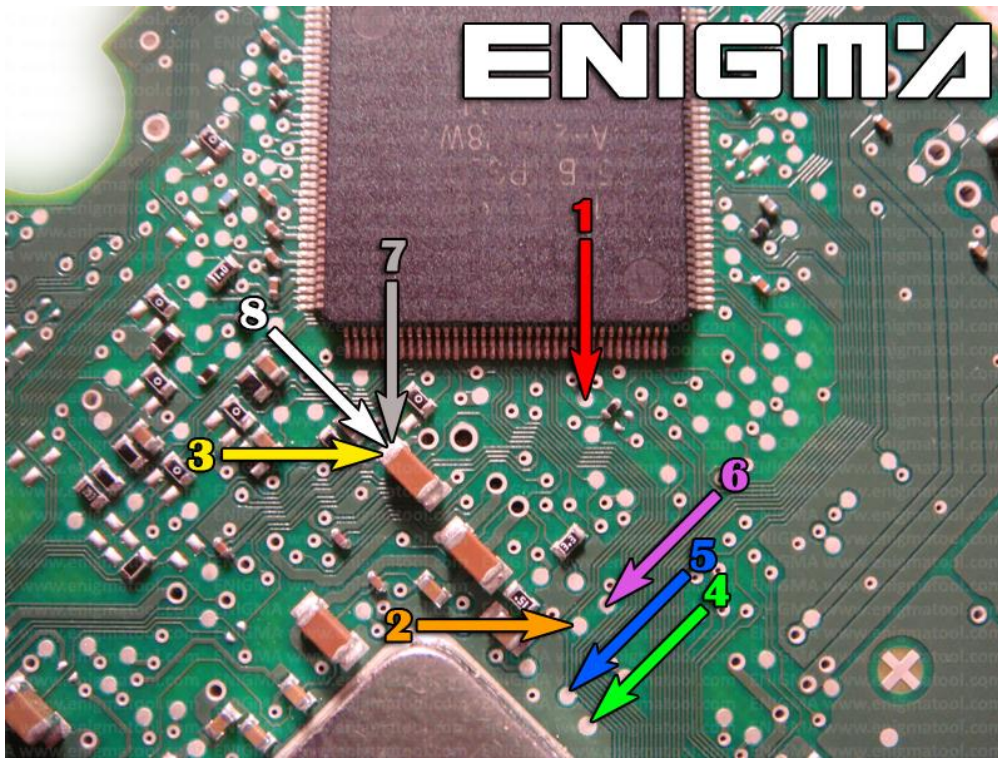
Solder C7 cables according to colors like shown on the picture above.
